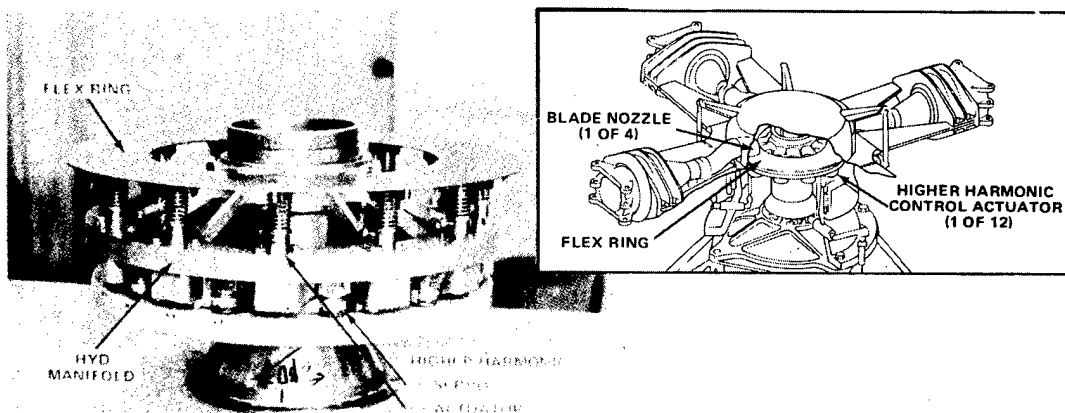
XH2/CCR Nonrotating Hub Valve Assembly
